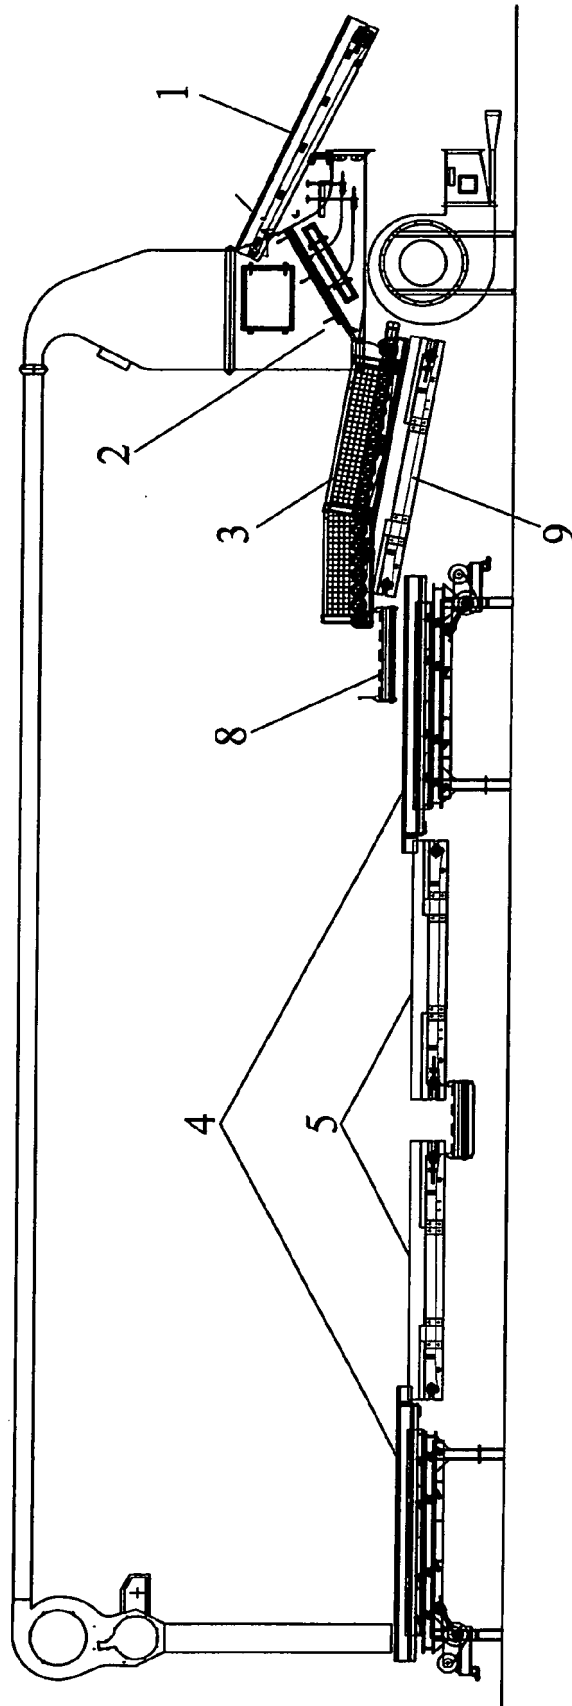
presents the main parts of a tobacco leave cleaning row from scrap and foreign materials which are: conveyor belt for the entrance of the tobacco
